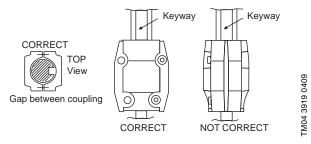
Coupling adjustment all CR(I)(N)(X)(T)
